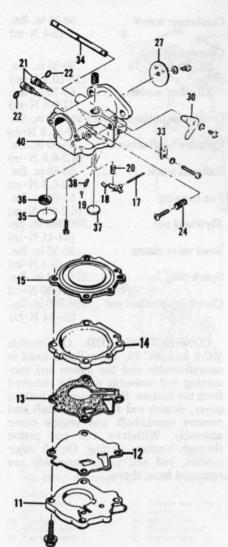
Exploded view of McCulloch 50070C diaphragm carburetor and diaphragm type fuel pump assembly used on MC-10 engine.
